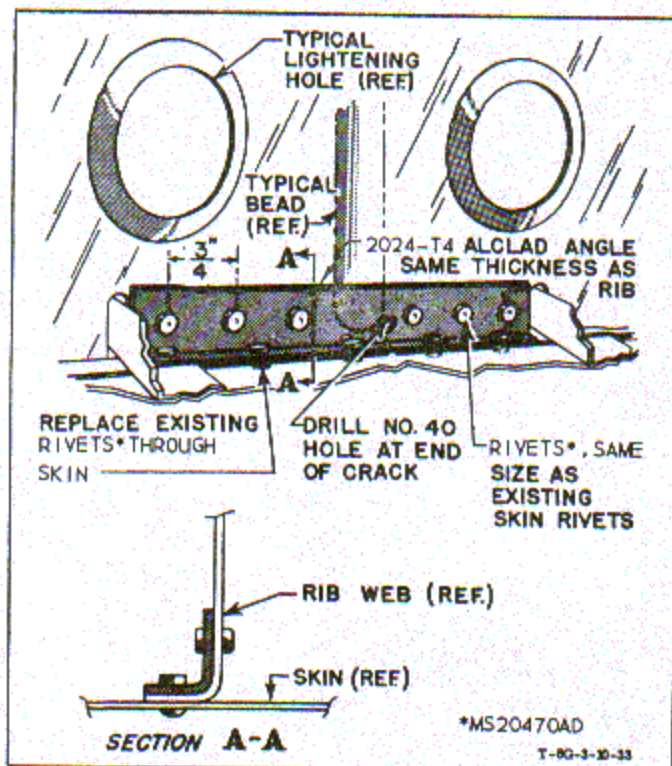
Typical Rib Flange Repair Where Flange Is Riveted to Skin
